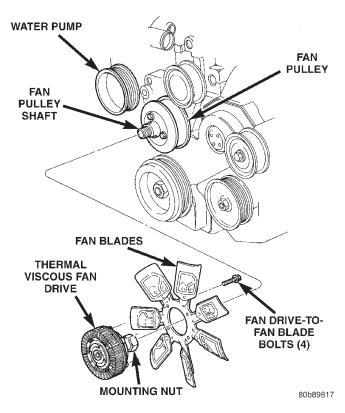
Thermal Viscous Fan Drive and Blade Assembly
